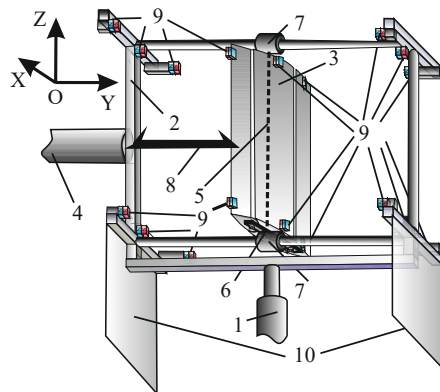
Conceptual design of the wind generator: 1 – support pipe; 2 – frame; 3 – wing; 4 – linear cylindrical electric generator; 5 – axial rod; 6 – bearings; 7, 8 – holders; 9 – locking magnets; 10 – plates
